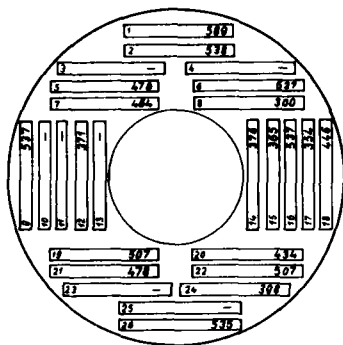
Specimen plan for bending specimens (4-point) of separated side discs
